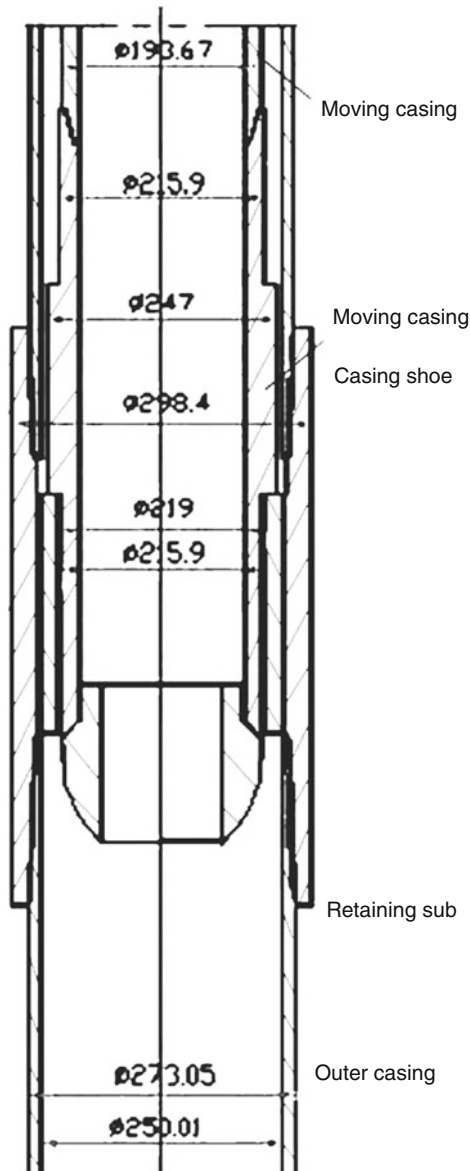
Bottom end setting of 193.7 mm moving casing
